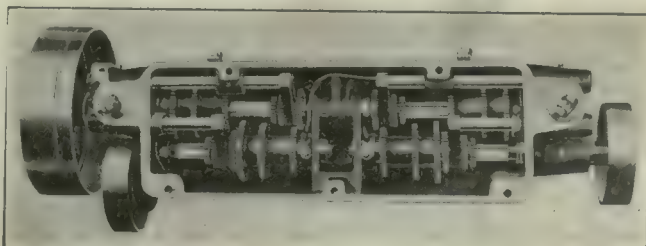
INSIDE OF SPEED-CHANGING GEAR-BOX UNIT
